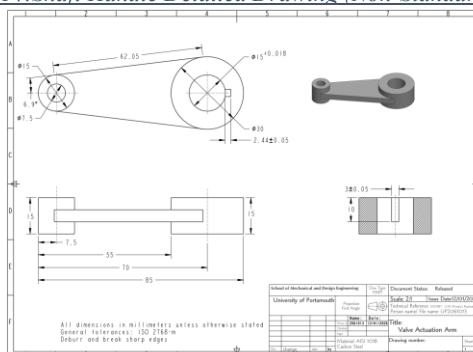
Valve Actuation Arm Detailed Drawing (Non-Standard Part)
